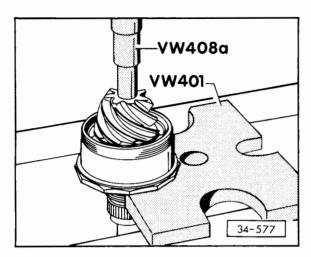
Heat inner races of double tapered roller bearing to about 100° C, install and press home
